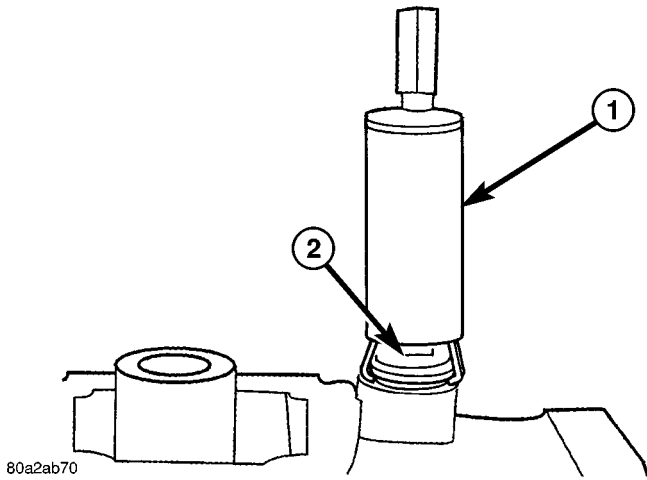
SHIFT SHAFT BUSHING LOCK BOLT
